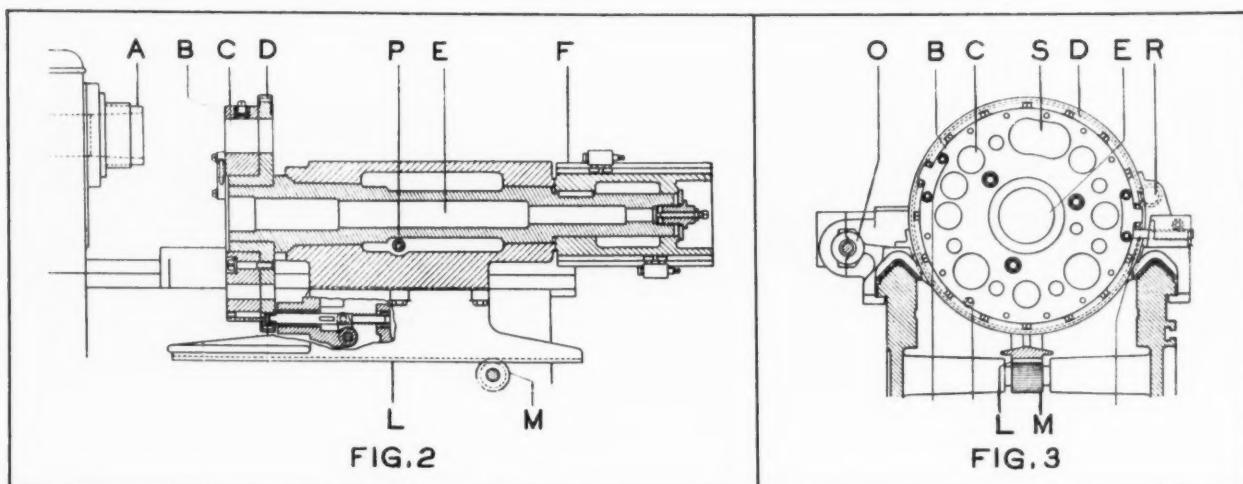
Longitudinal Section through Tool-head of Machine shown in Fig. 1. Fig. 3. Cross-section through Tool-head
